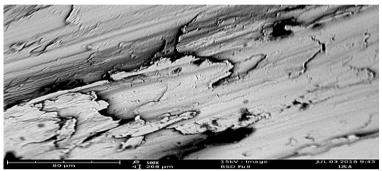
Fracture Surface of Test Specimen of High Heat Inputs at 500X Magnifications
